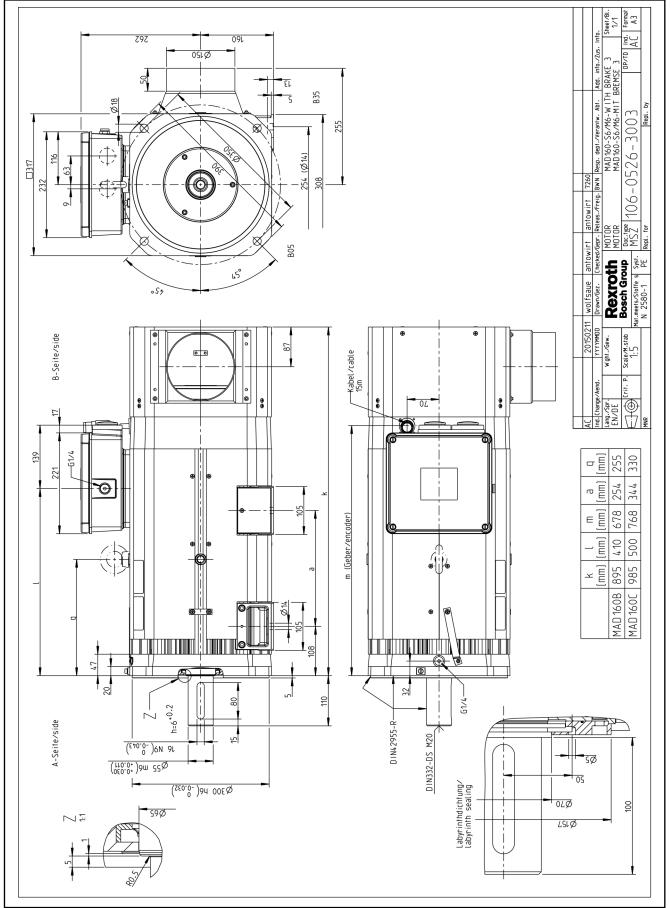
MAD160 with encoder M6/S6, brake 3
